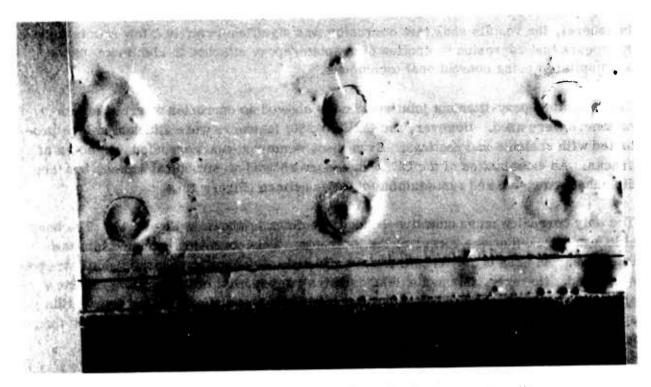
Specimen 61 after Cyclic Tension Loading Showing Partial Fastener Cracking (2 x)
